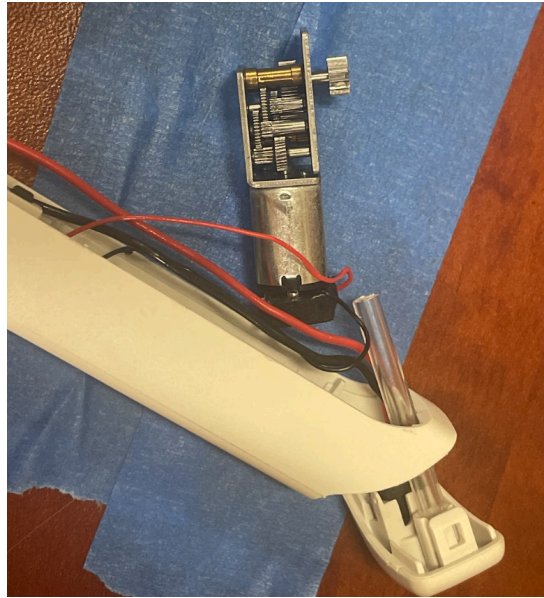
Reverse Engineering of the Mynt3D Pen. The figure shows the gearbox used for the direct drive extruder.
